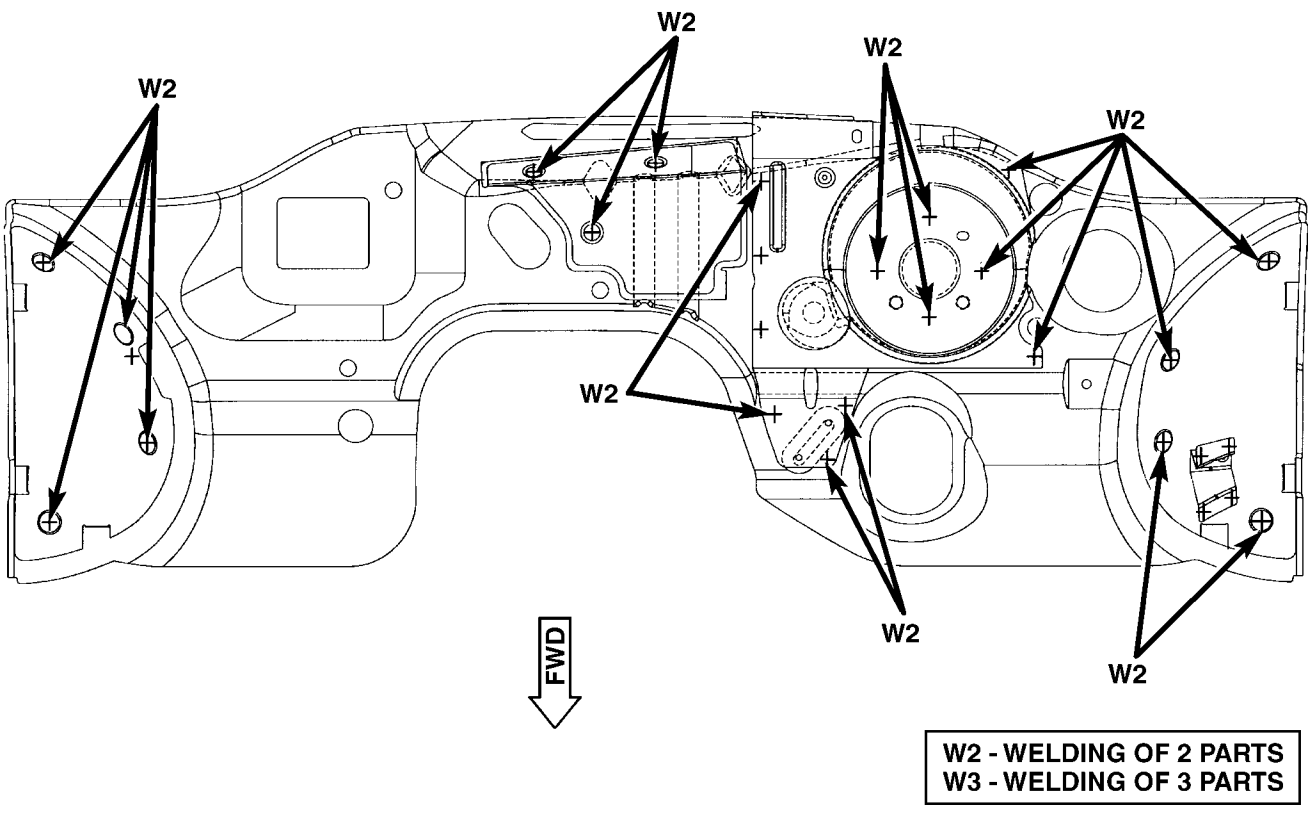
WINDSHIELD WIPER TAPPING PLATE TO WINDSHIELD WIPER CENTER ATTACHING PLATE & LOWER WIPER MODULE PLENUM BRACKET
